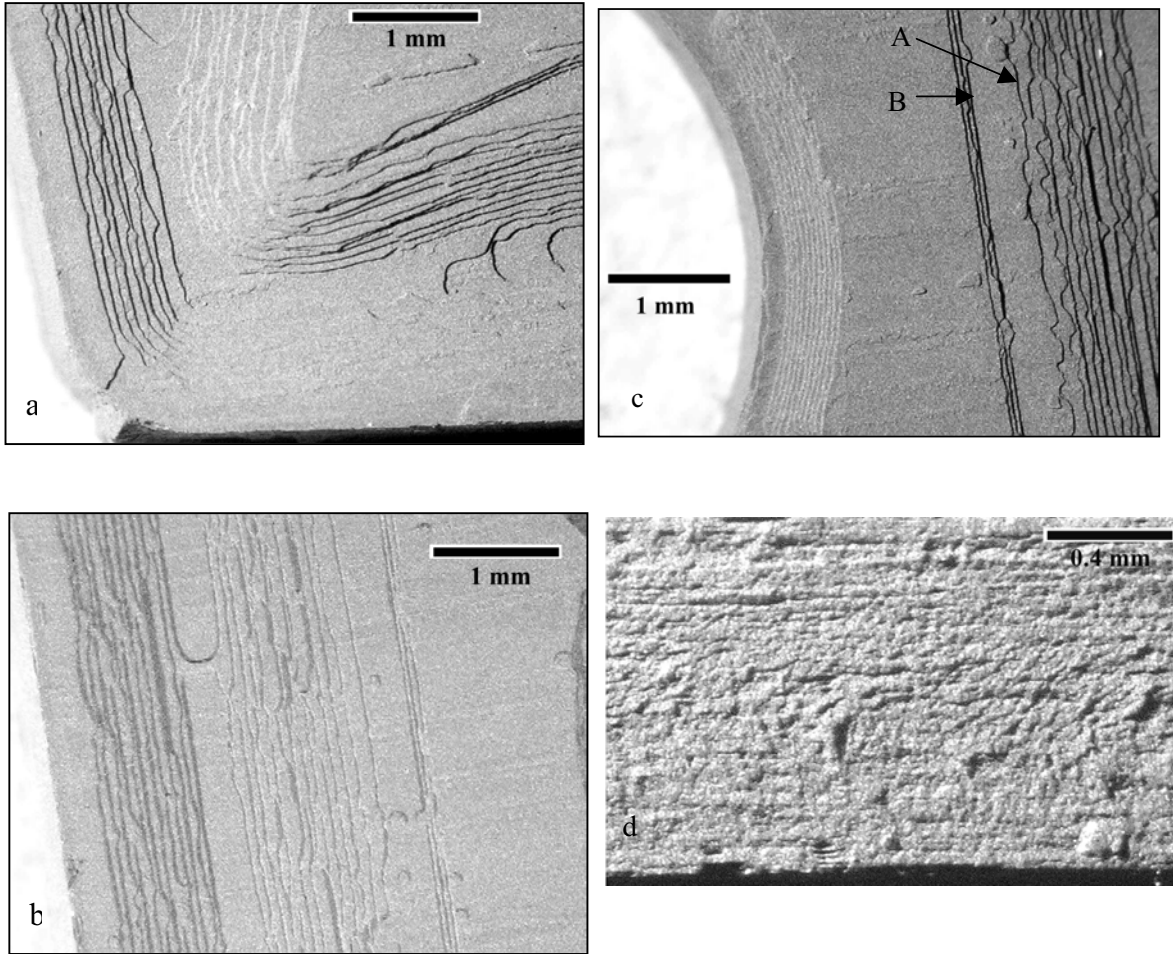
(a-c). Images of printed CNMG style insert. a) 110° corner. b) edge, chip breaking groove top land. c) through-hole with counter sink, top land and slope back to chip breaker. d) edge (side view), slurry rastering direction is out of the page.
